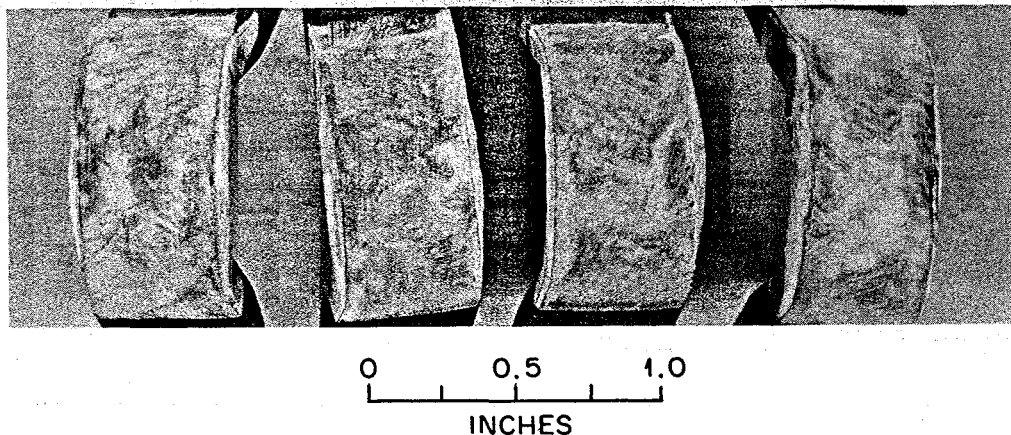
Side-bend specimens of a weld made using heat 72-115 (0.7% Hf) base metal and heat 5005 (standard Hastelloy N) filler metal. The samples were examined with dye penetrant, and no flaws were visible.
